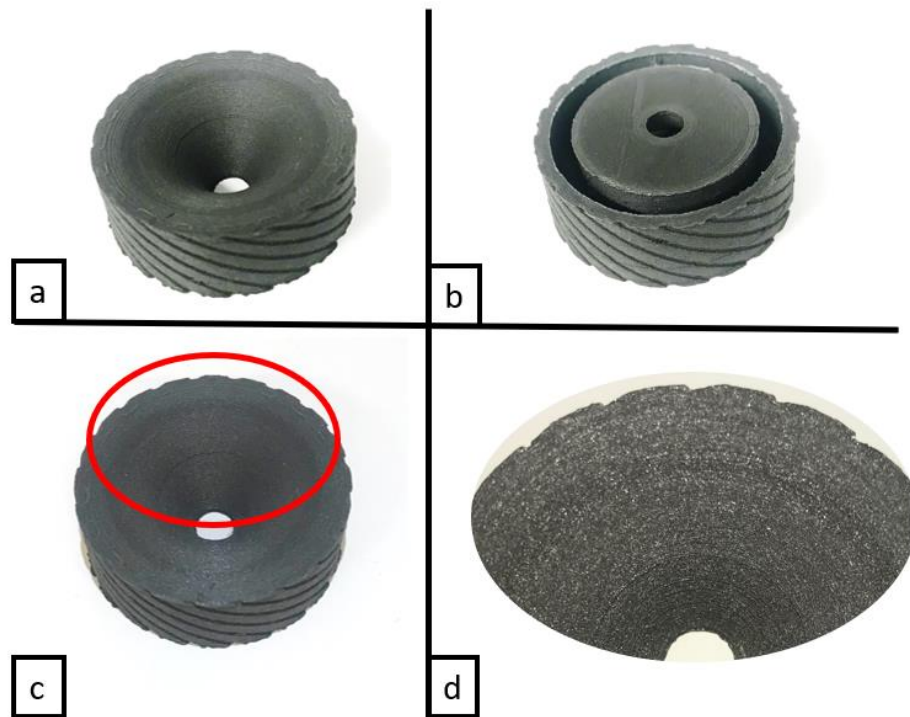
Images of the final rotor prototype showing a) the top half of the rotor b) the top half of the rotor flipped upside down c) the top half of the rotor with section d) close up of the rotor showing the detail of print for the bevelled-step herringbone grooves.
